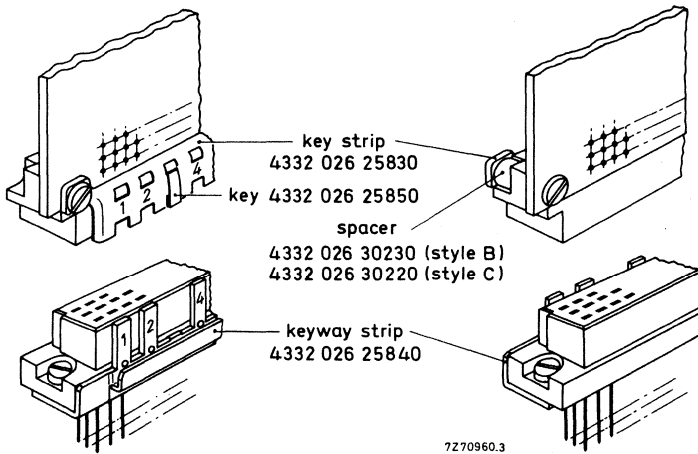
Coding parts; key strip mounted to solder side of printed board.
